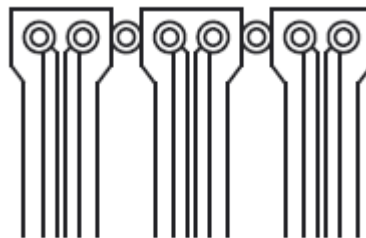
Example PCB Thru Hole Layout, Termination Side
